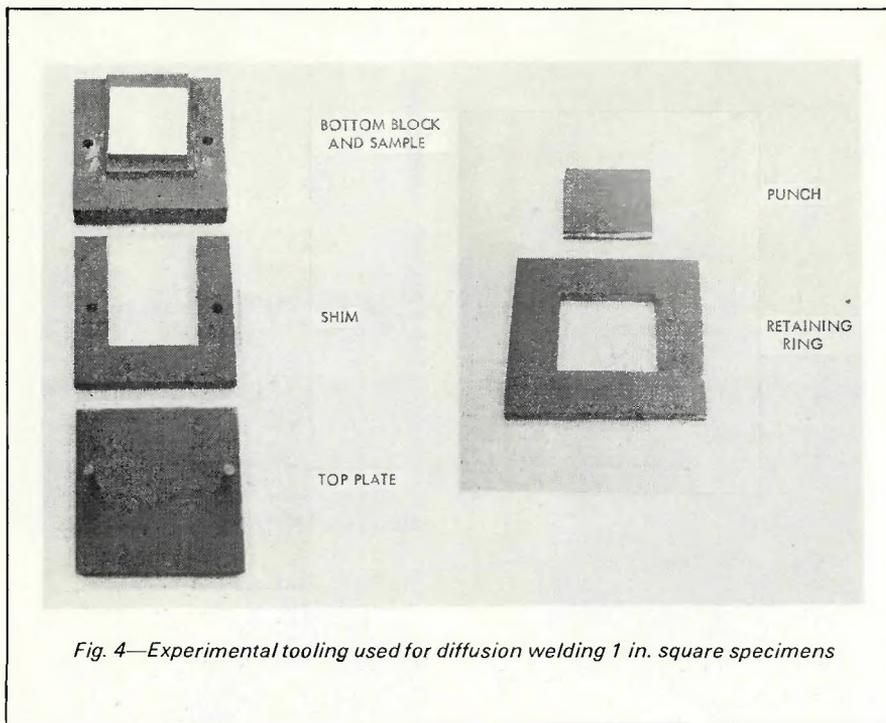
Experimental tooling used for diffusion welding 1 in. square specimens
